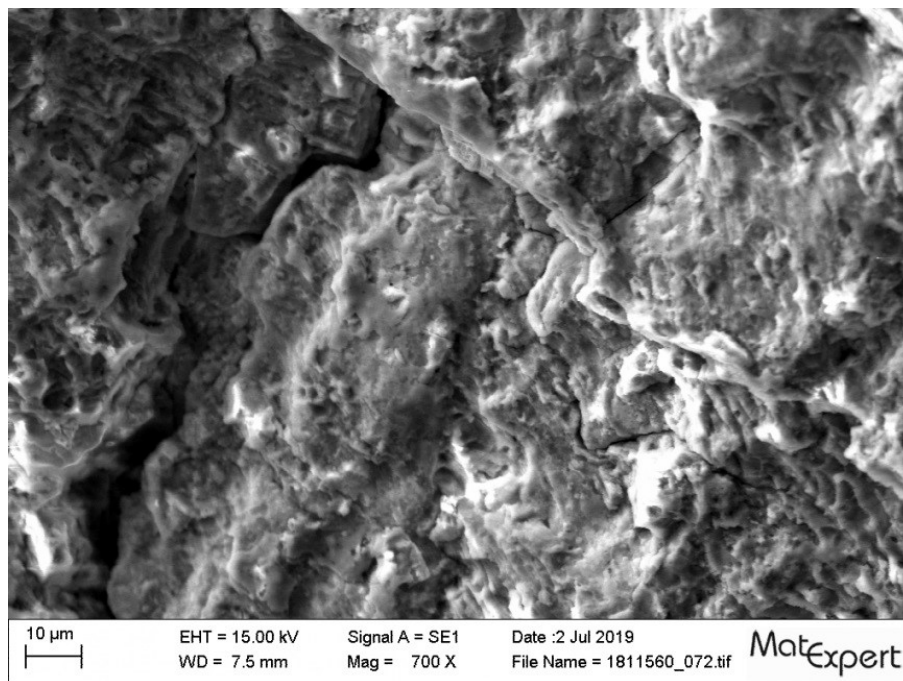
Exposed crack (arrow) under joint 89 on the lower spar section L1.
